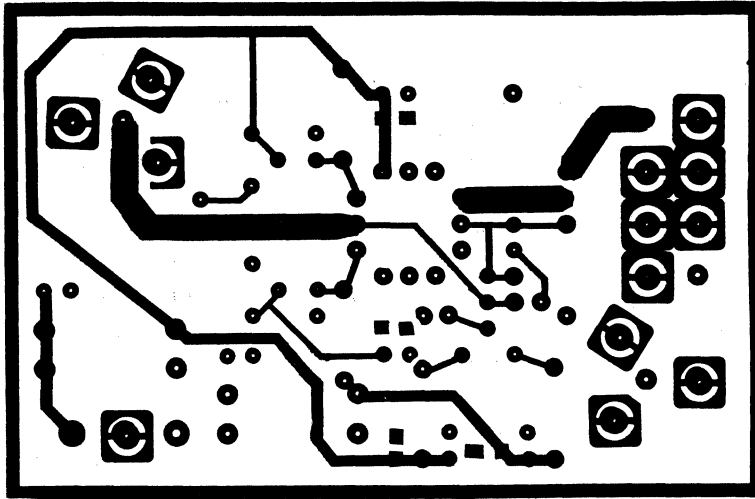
EB102 BUFFER BOARD LAYOUT AND COMPONENT POSITION
